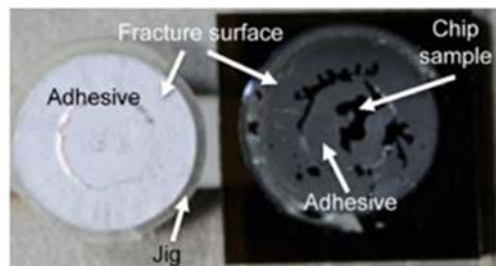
Fractures at the interface between the adhesive layer and the sample [11].
